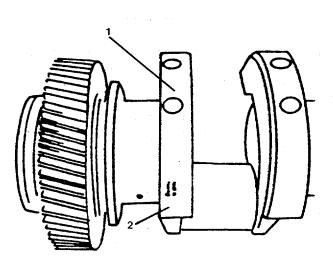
Marking on the Crankshaft for Oversize Thrust Bearing.
